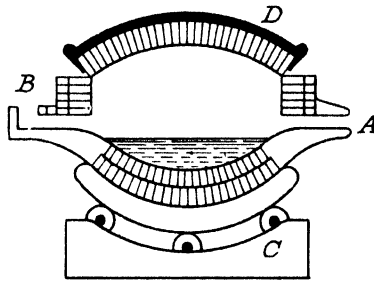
Sectional Diagram of the Cradle Furnace.
